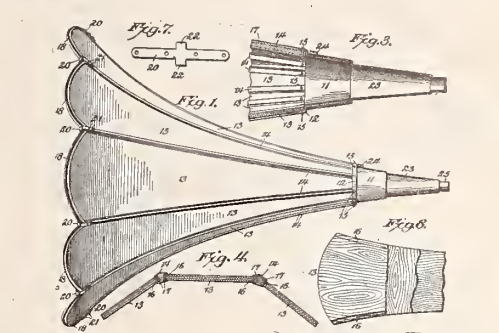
is a side elevation of the horn, showing the reducer in place thereon. Fig. 2 is a front elevation of said horn. Fig. 3 is a detail longitudinal sectional view through the smaller end thereof. Fig. 4 is a detail cross-sectional view thereof. Fig. 5 is a detail longitudinal sectional view on the line 5—5 of Fig. 2. Fig. 6 is a sectional view on the line 6—6 of Fig. 5. Fig. 7 is a detail view of one of the clip blanks. Fig. 8 is a detail view of a portion of one of the horn sections, the parts being broken away to illustrate the arrangement of the veneers. Figs. 9 and 10 are cross-sectional views illustrating modifications of the tie strips.
